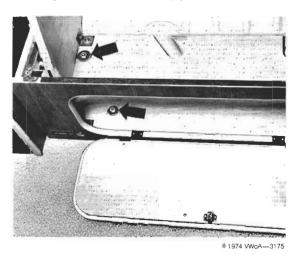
Nuts and bolts that hold cabinet bottom.
